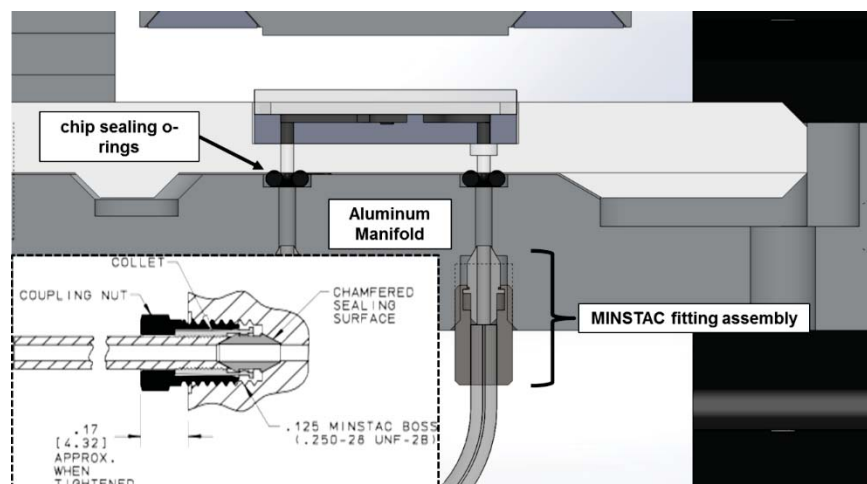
Extractor manifold cutaway – MINSTAC fitting sealing [25]
